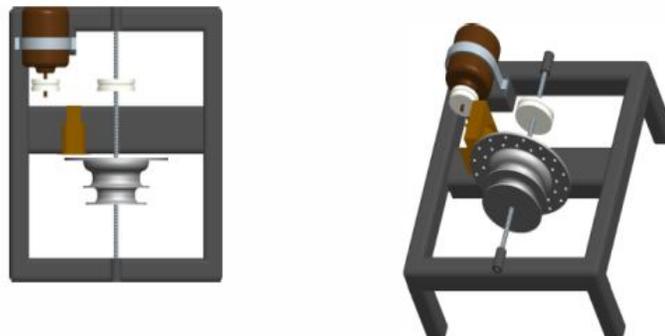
Assembled View of the Electro Magnetic Braking System using Pro E Software
